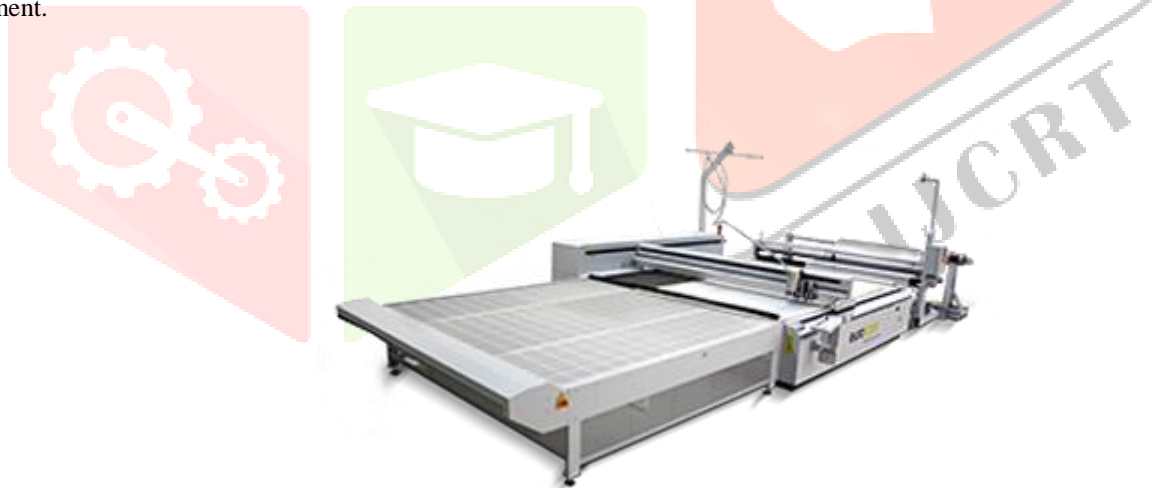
Laser cutting machine (Source – Core.ac.uk)
